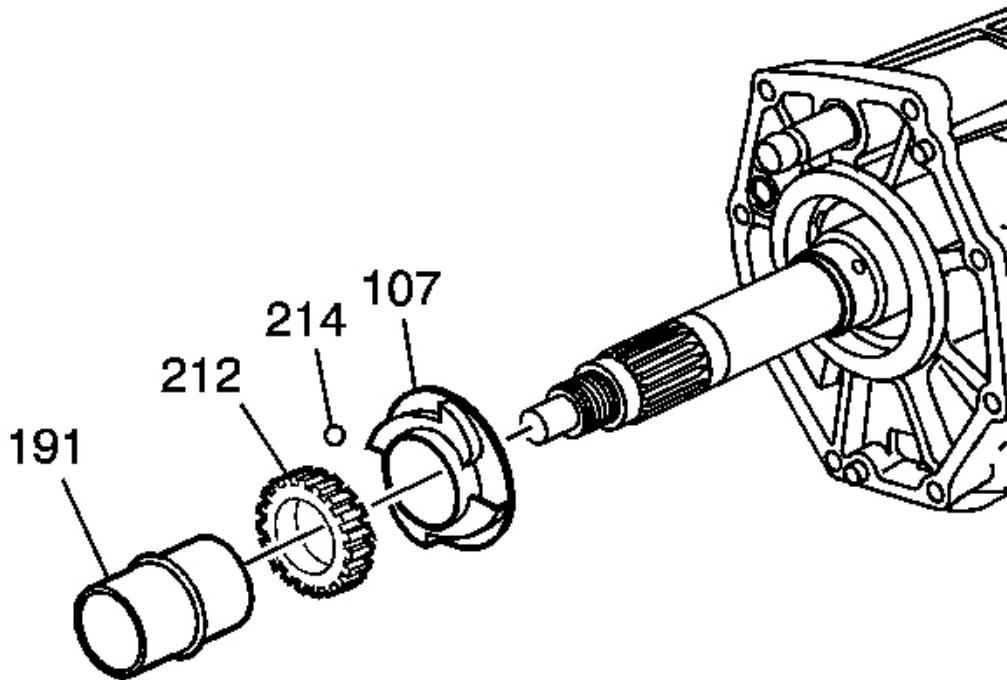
View Of Vehicle Speed Sensor Drive Gear, Spacer, Locking Ball & Main Shaft Bearing Oil Slinger
